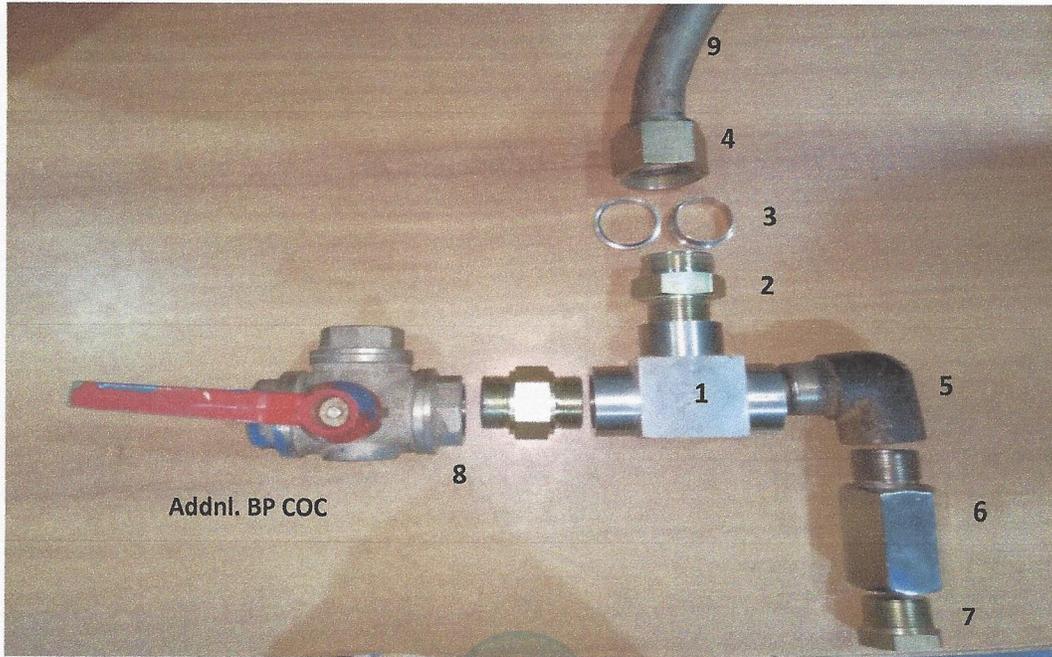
Provision of FTIL make EEV/ mod. Design NB-11 in CCB locos
